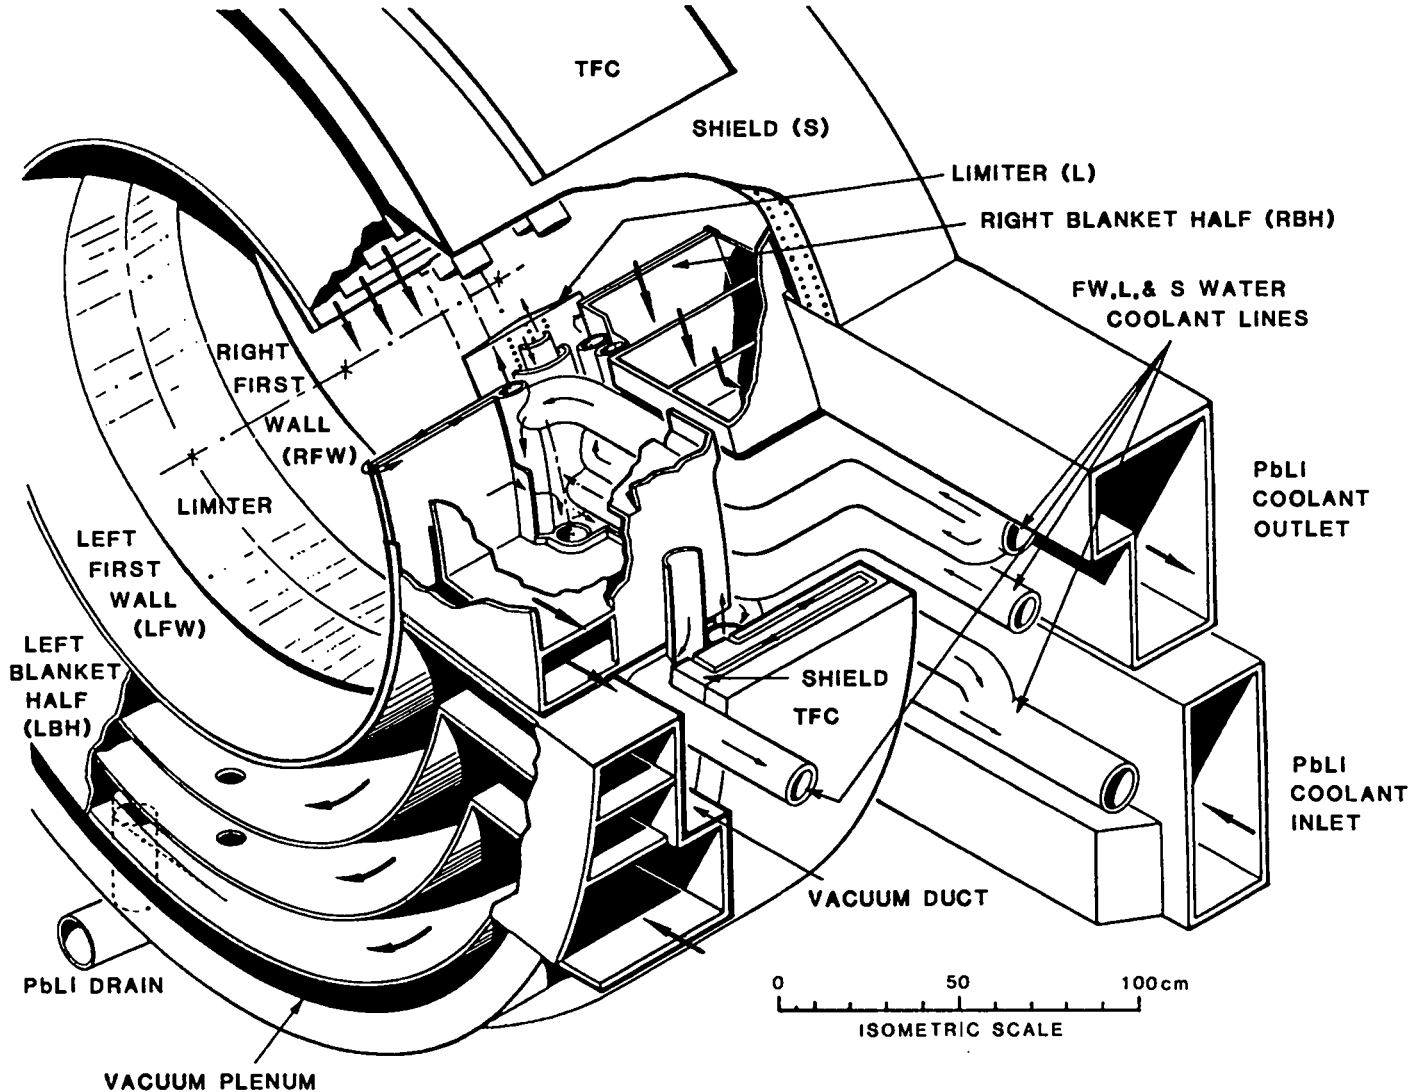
Detailed isometric view of one of $N = 24$ reactor-torus sectors showing first-wall, blanket, shield, and coolant manifolding.
